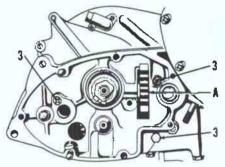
Drawing of inner cover showing the three screws (3) which attach cover.
